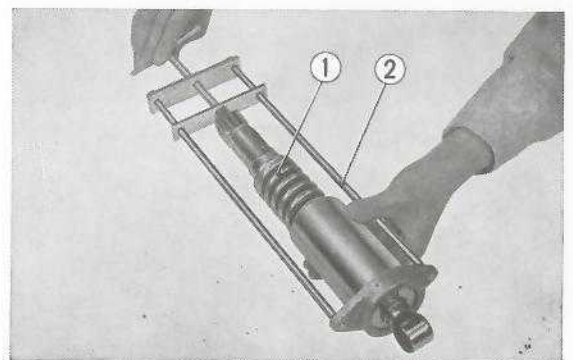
① Rear cushion spring ② Rear cushion disassembling tool
